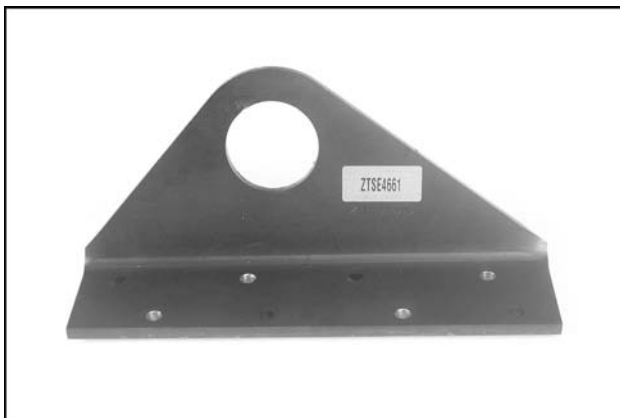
Cylinder Head Lifting Bracket, ZTSE4661
